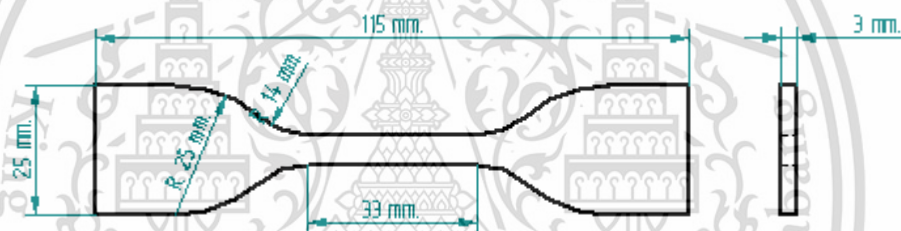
Dimension of dumbbell specimen following with ASTM D412-80.
